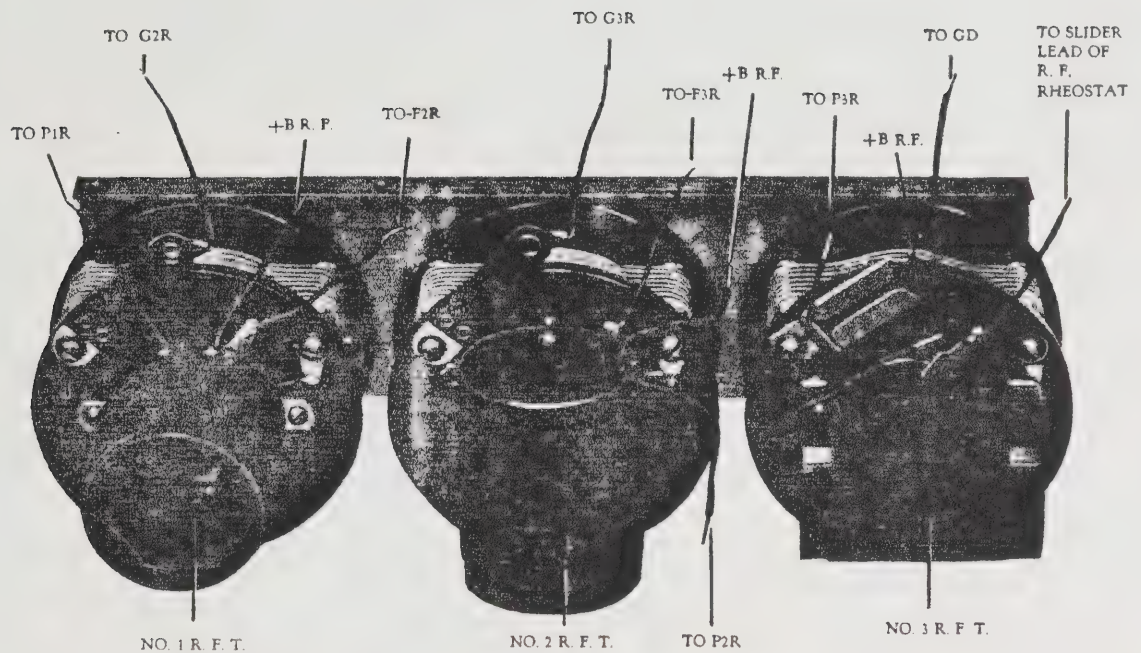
VIEW OF SUB-PANEL ASSEMBLY MODEL 30 (Early Type), SHOWING WHERE EACH LEAD IS TO BE CONNECTED.
